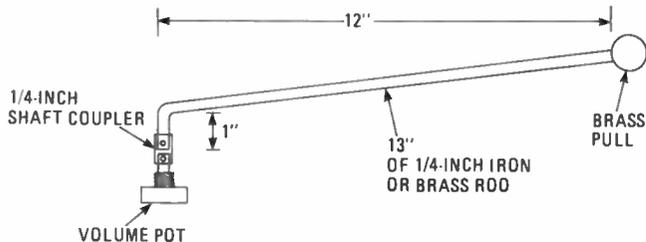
An interesting volume control can be made from a rod and a cabinet knob. Be sure you know the diameter of the pot shaft before purchasing the rod and coupler.
